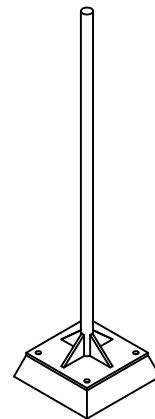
FIG. (c) FLOOR MOUNT EXTERNAL VIEW
